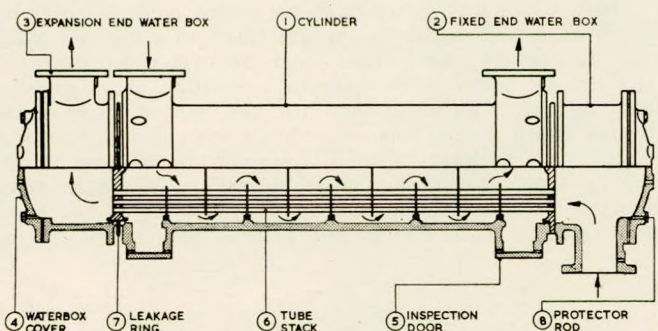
Marine type tubular heat exchanger showing distribution belts, inspection doors and removable covers in the water boxes
